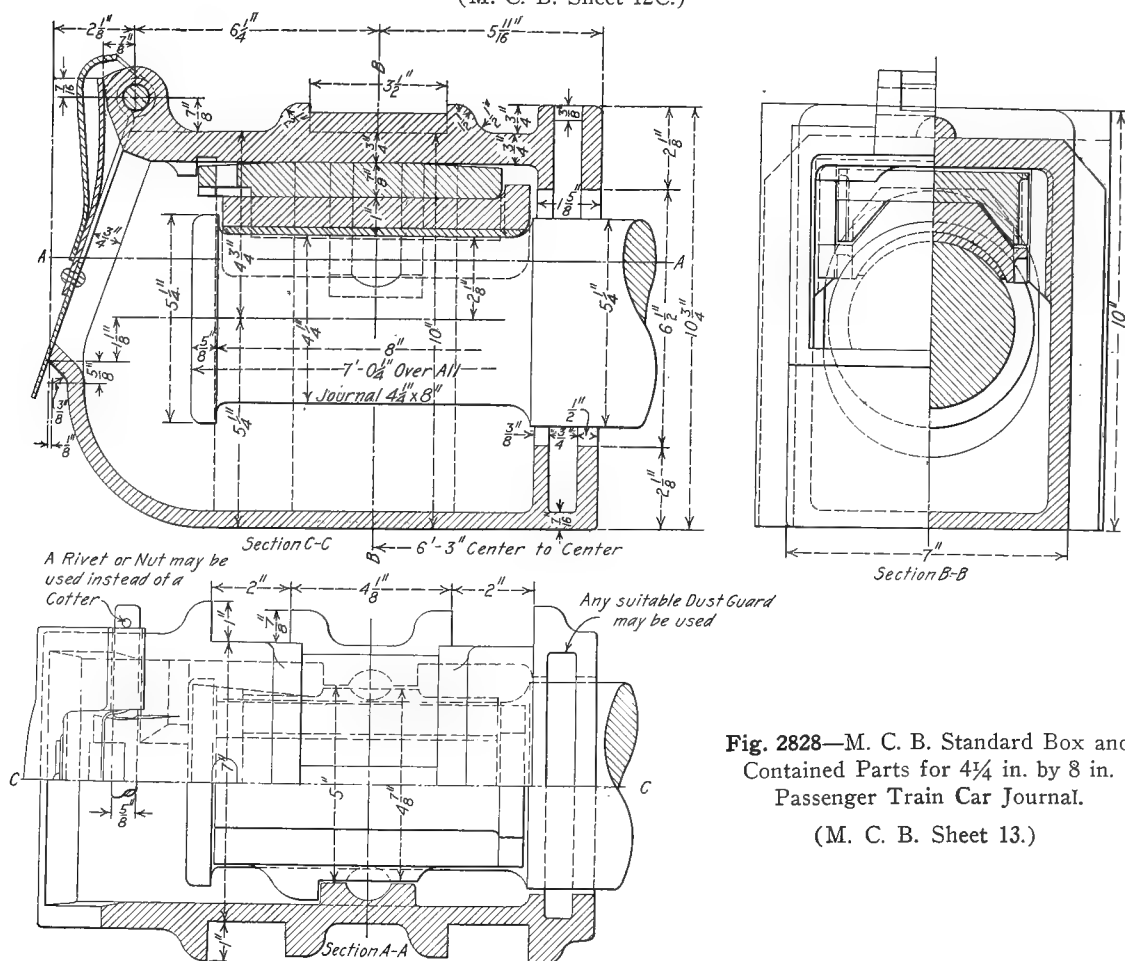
M. C. B. Standard Box and Contained Parts for $4\frac{1}{4}$ in. by 8 in. Passenger Train Car Journal.
